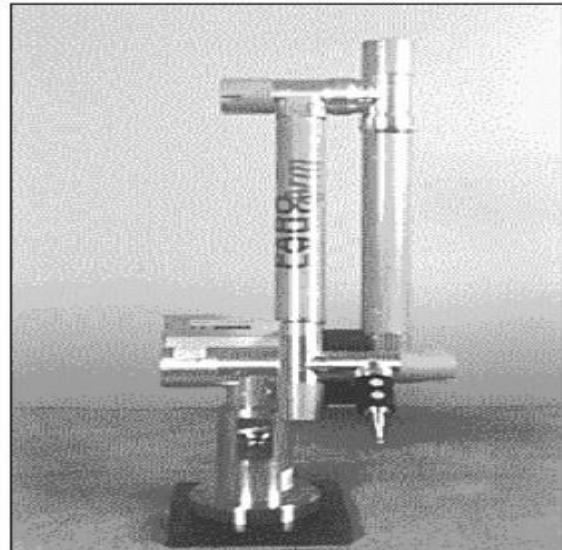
FaroArm coordinate measurement machine (CMM) [4]
